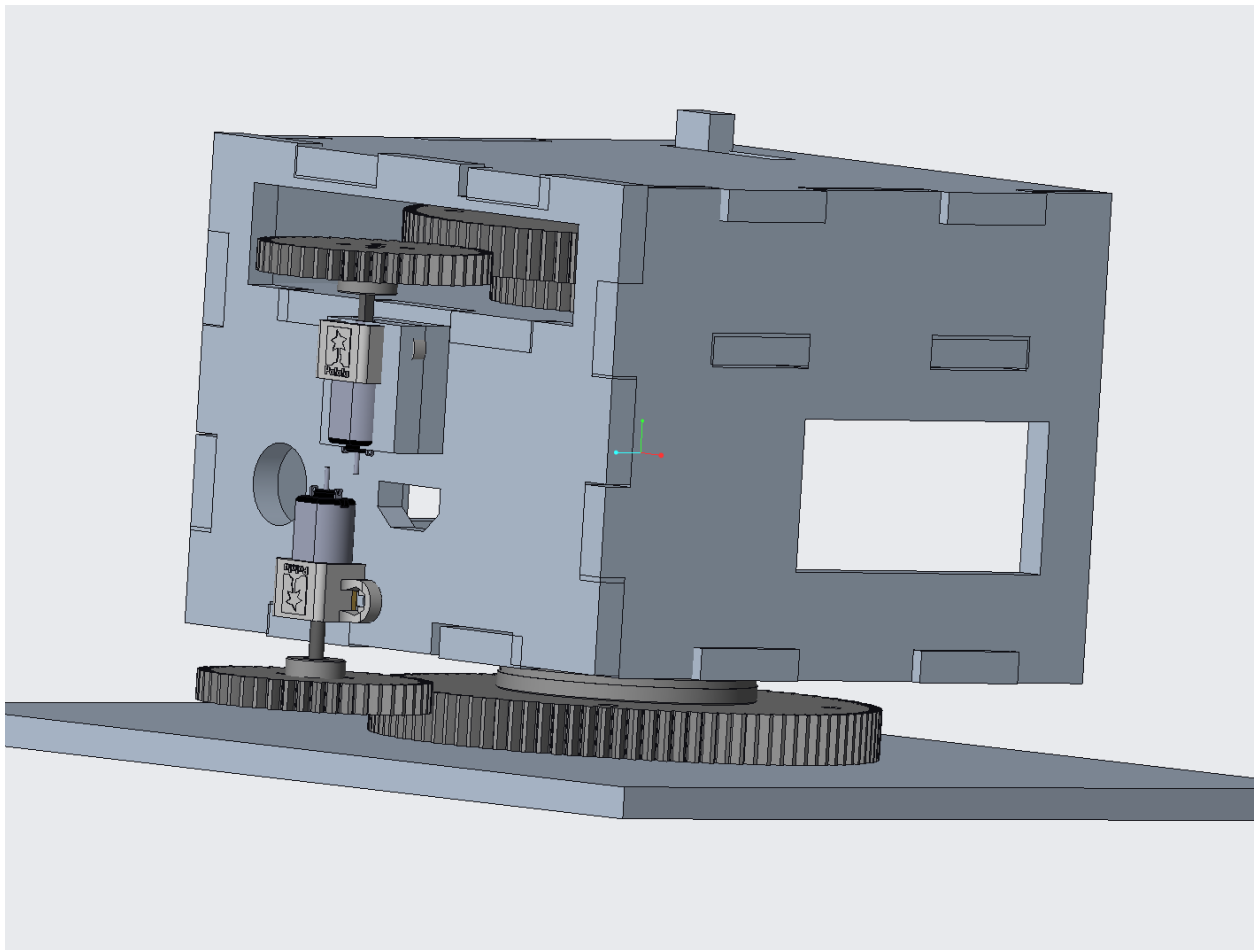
Motor and gear mechanisms for projector/housing rotation (bottom). Motor and gear mechanism for focus toggling (top)
